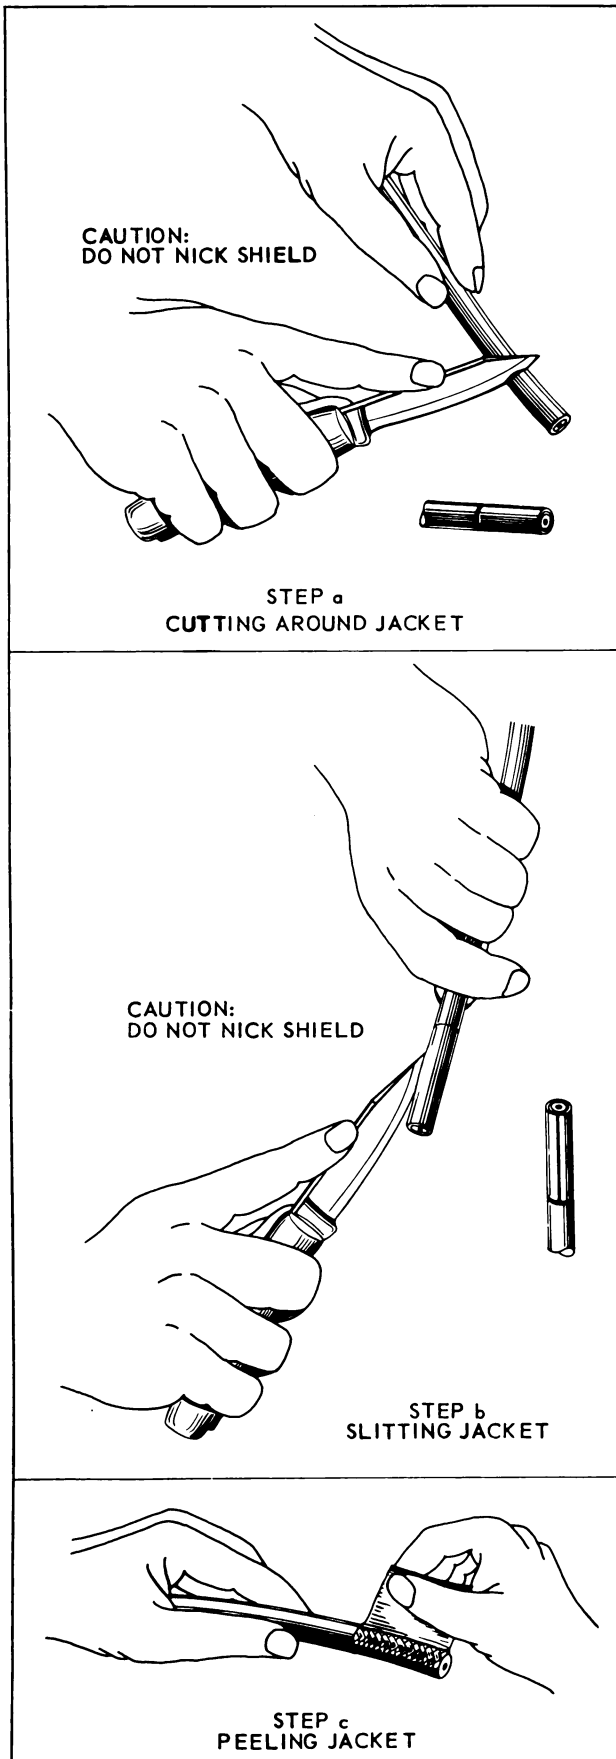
Stripping Outer Jacket from Coaxial Cable
